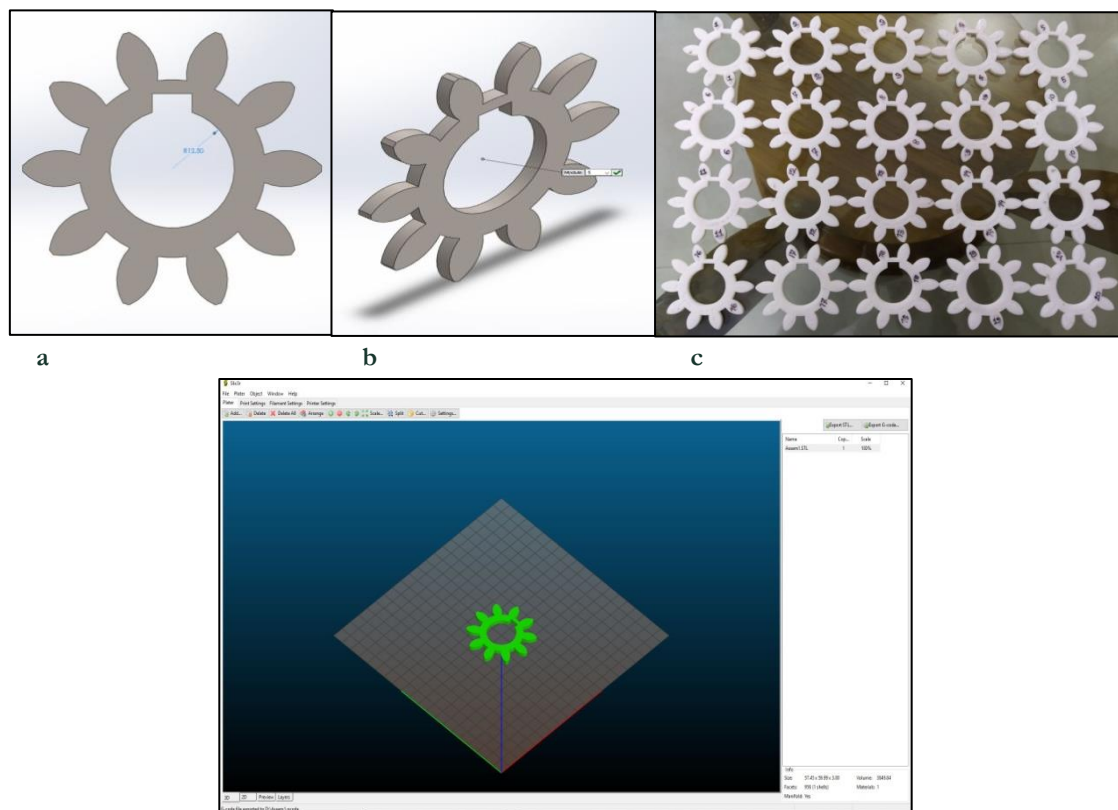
a. Dimension of the test specimen; b. 20 3D printed spur gears; c. conversion of CAD model into G-code through Slic3r software.
